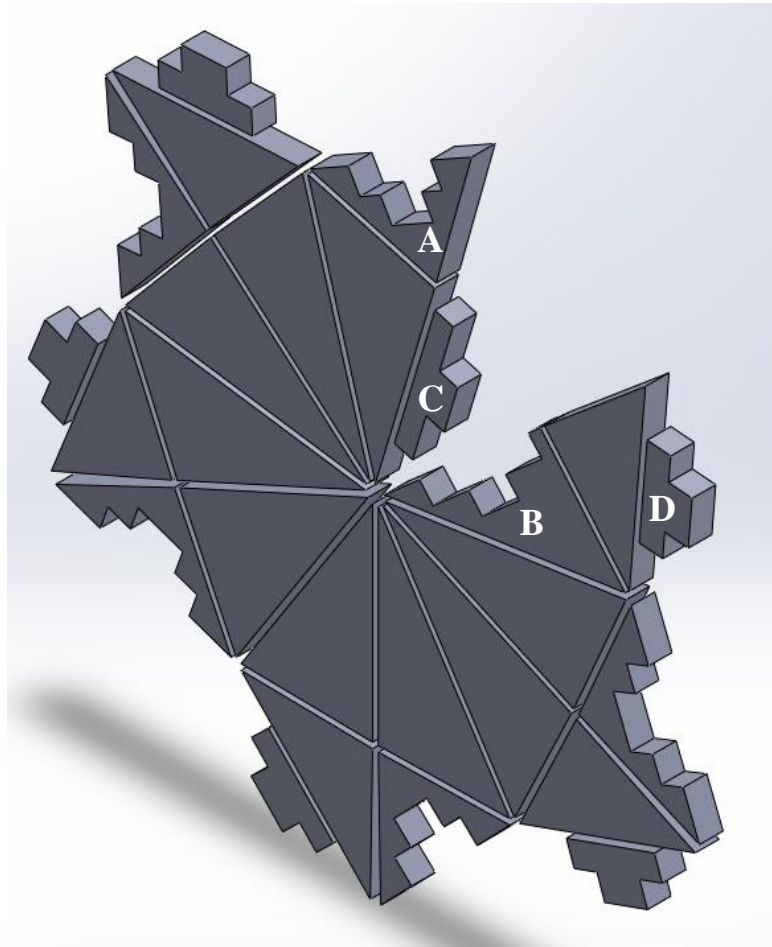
SolidWorks drawing of the pentagonal structure. The dimensions of parts A, B, C and D are given in the next figure.
